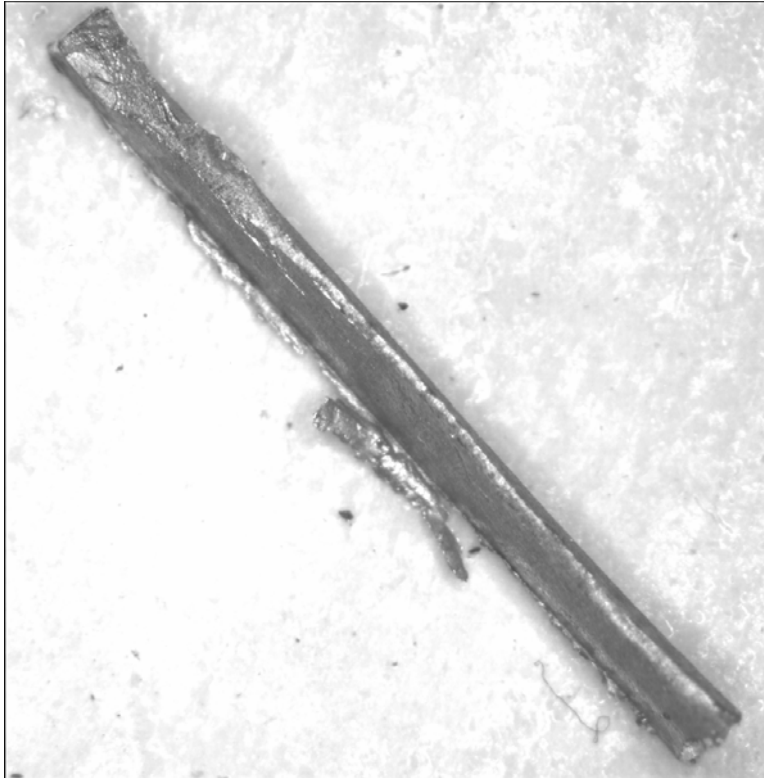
Fracture Surface of Specimen 1331.
